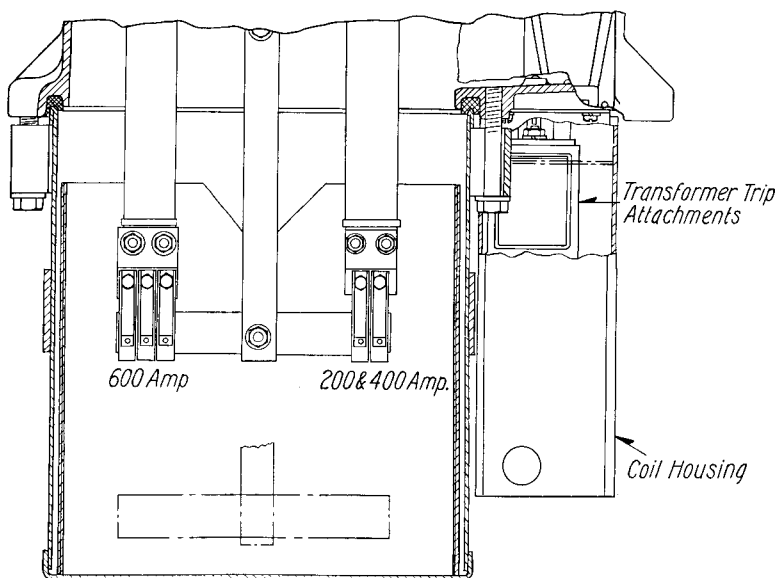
BREAKER UNIT WITH TRANSFORMER TRIP COILS
